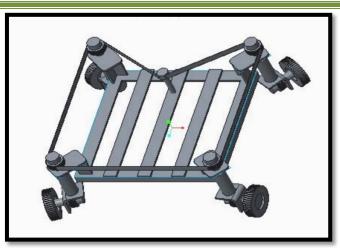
D Model Bluetooth 360° Rotating Mechanism
